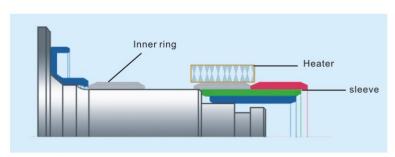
Mounting the bearing's outer ring & inner ring
